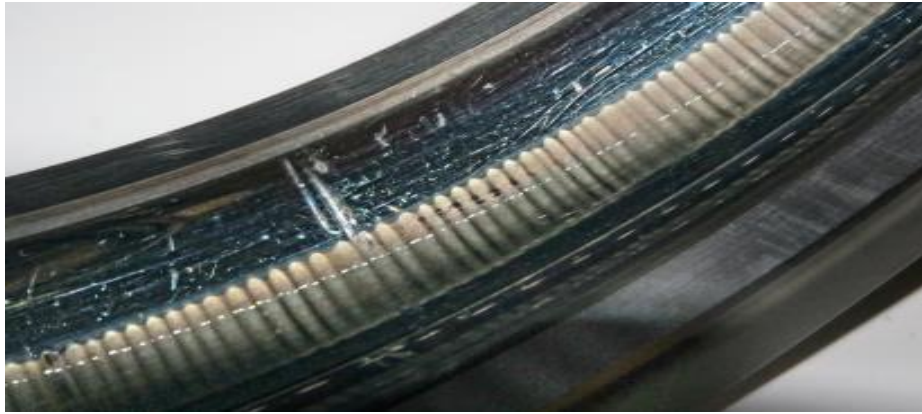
Macroscopic photography of a rolling bearing surface with electrical discharge erosion marks, 800 kW motor.
